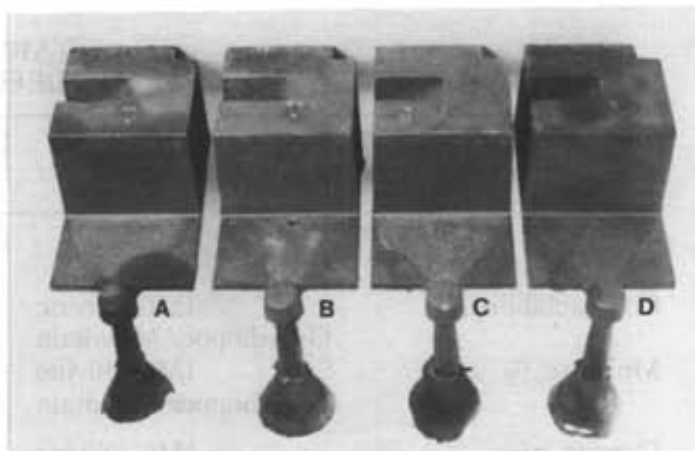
Burn-on and erosion on the bottom surfaces of scab blocks made in first and fifth castings. Blocks A and C are IMC Olivine 50, first and fifth castings respectively. Blocks B and D are Grasshopper Mountain olivine, first and fifth castings respectively (from Whiting *et al.*, 1987)
